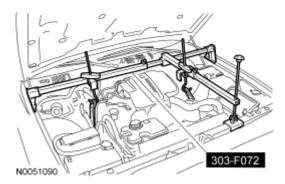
Engine Support Tool Courtesy of FORD MOTOR CO.
